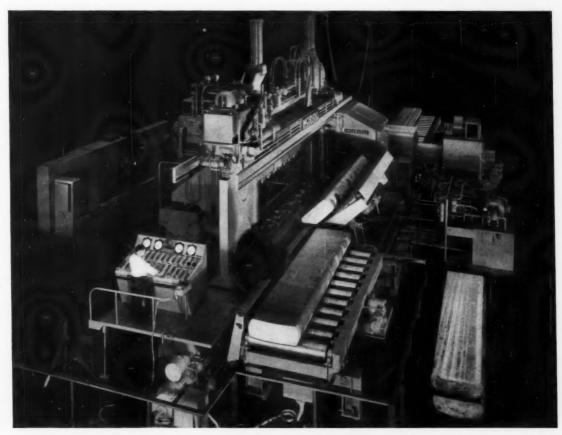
Front view of Ingersoll scalper showing control panel, billet on way to loading station where preceding billet is being tilted into position before passing between two huge heads
